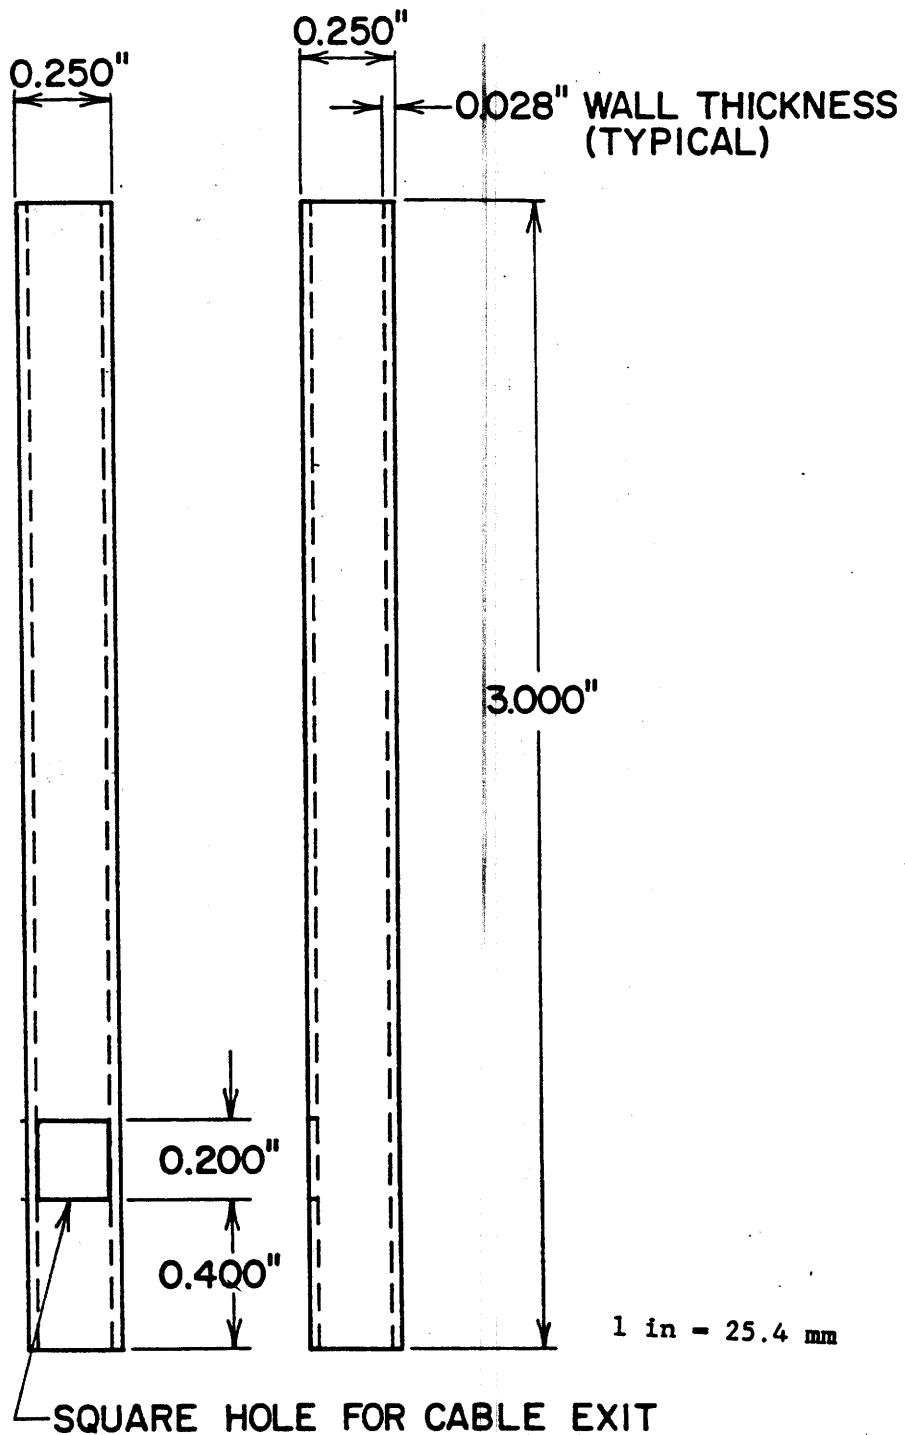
Manufacturing drawings--transducer assembly (magnet tube).
